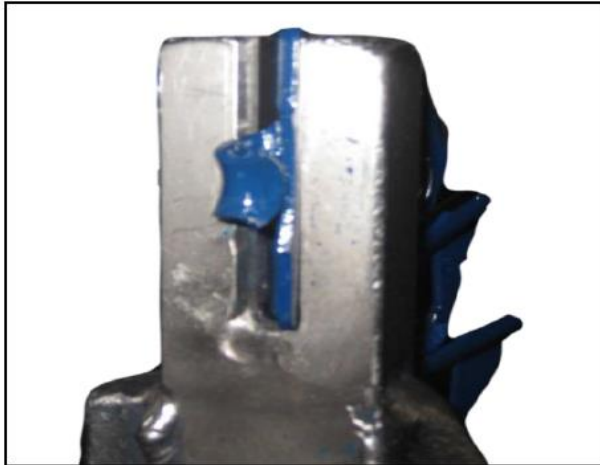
Place the knuckle end of the chain into the chain breaker with knuckle protruding
